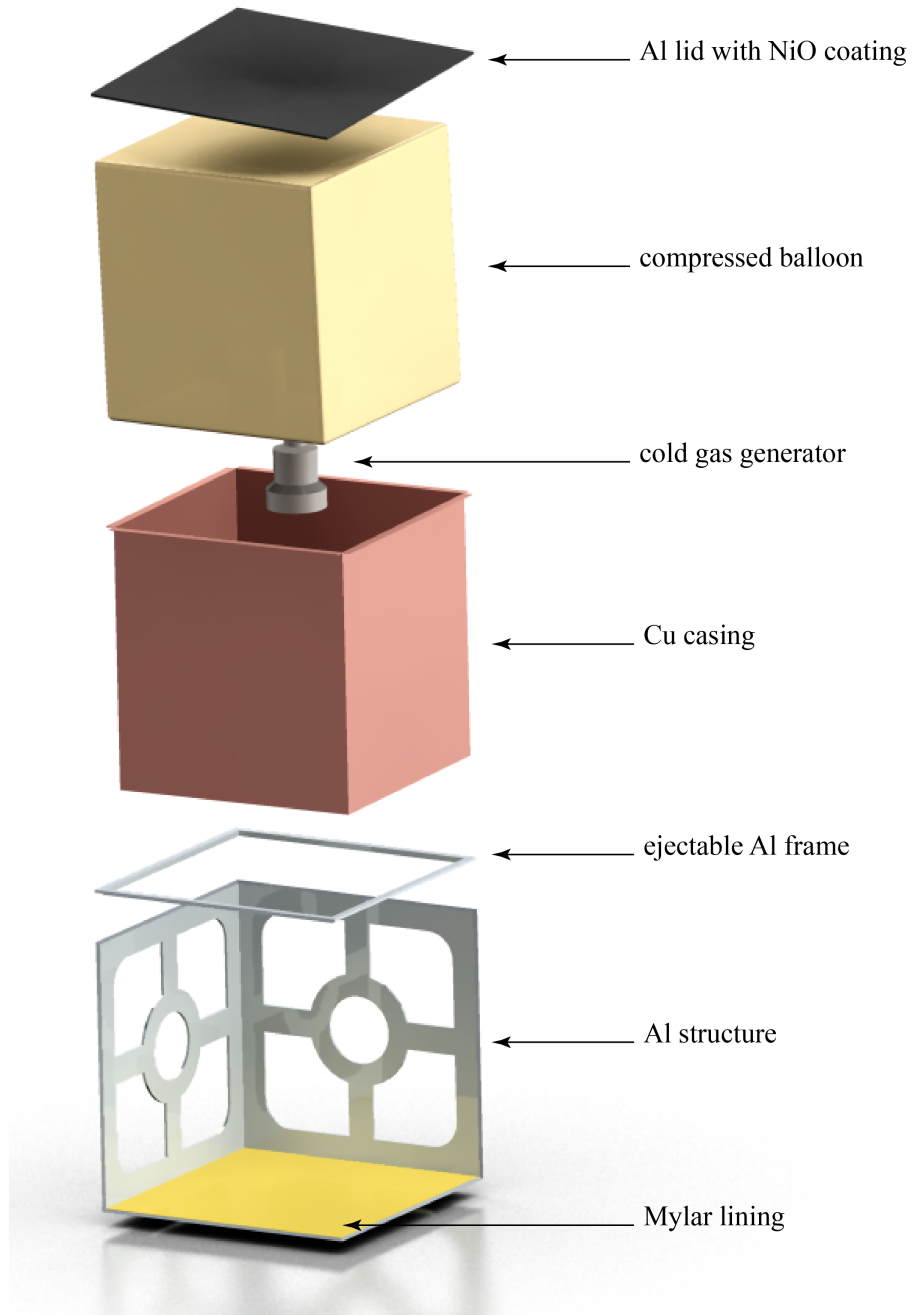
Exploded view of a possible orbit transfer module for CubeSats
